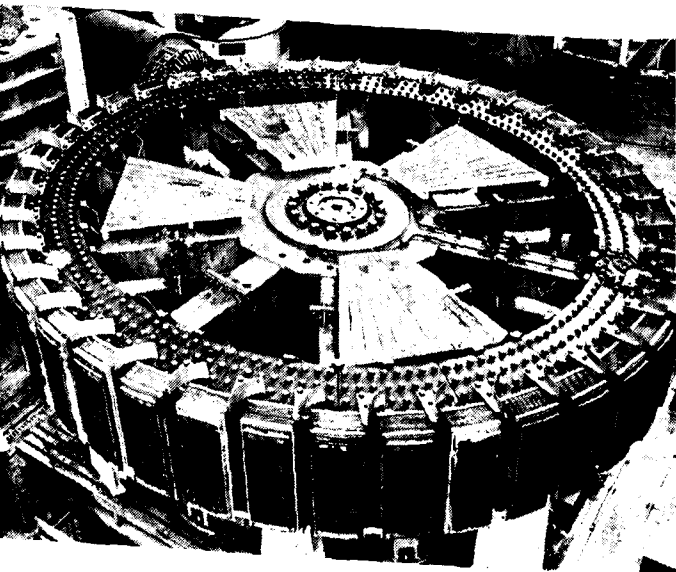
Rotor for the Rihand alternator during assembly for works test.
